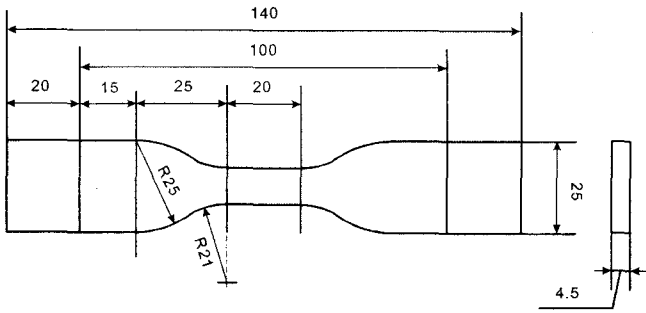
Shape and dimensions of tensile test specimen (unit : mm)
